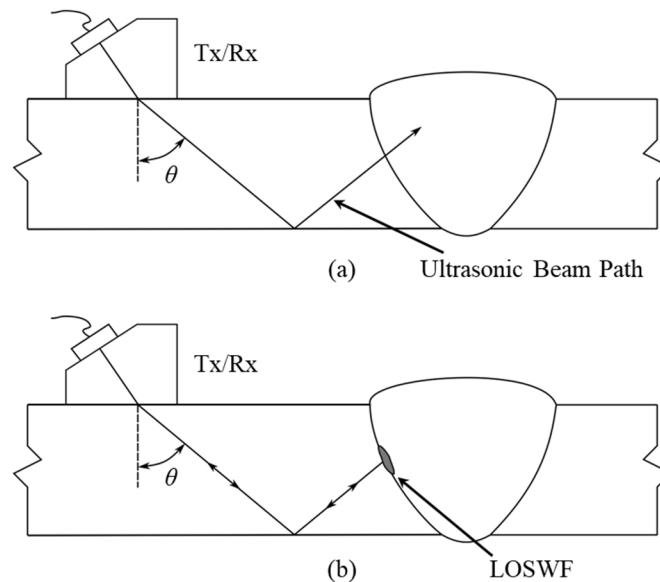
Angled beam inspection of a weld with (a) no flaws present and (b) a LOSWF present
